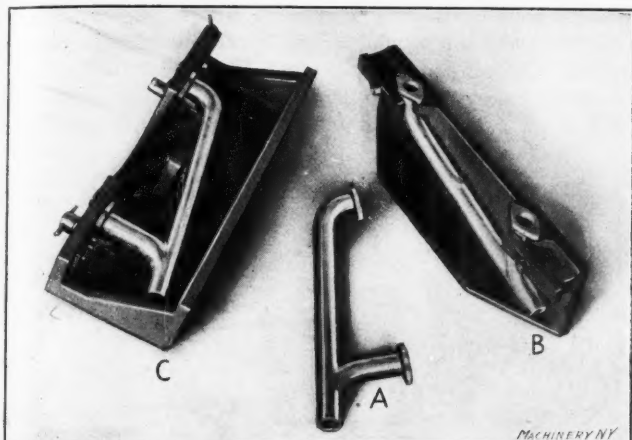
Milling and Drilling Jigs for the Outlet Water Pipes
